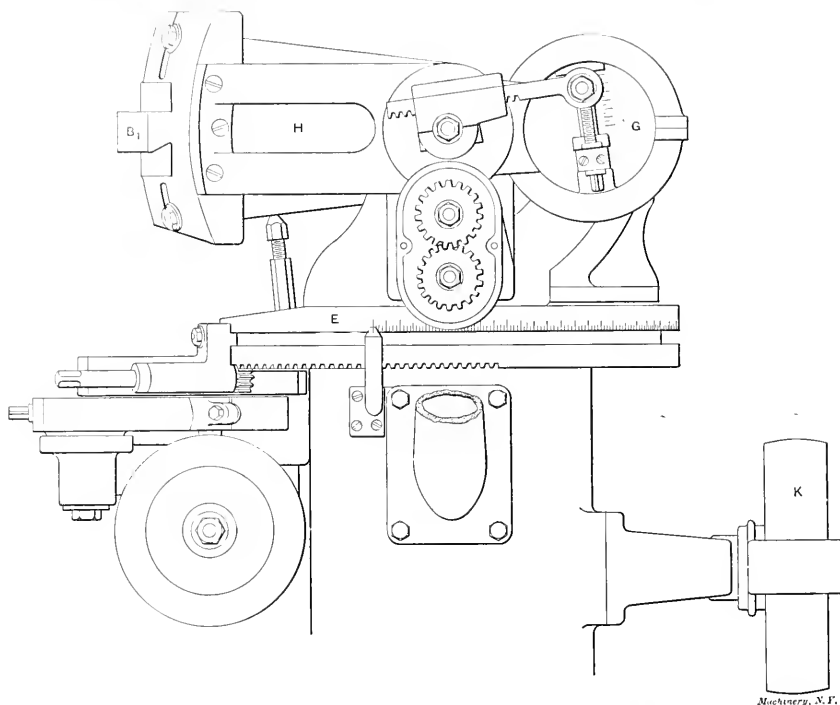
Elevation showing Mechanism for Operating Reciprocating Slides.
